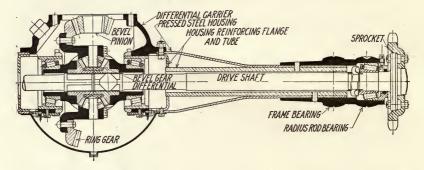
Kelley-Springfield Floating Jackshaft with Pressed Steel Housing.
